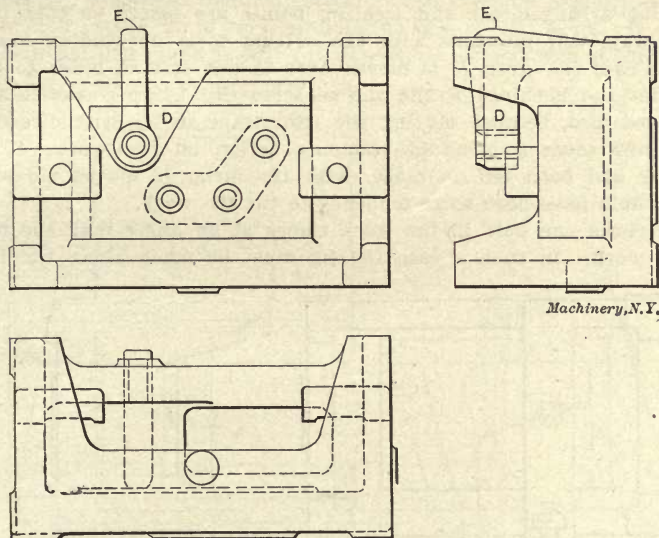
Modification of Jig in Fig. 91, which practically brings it into the Class of Open Drill Jigs
